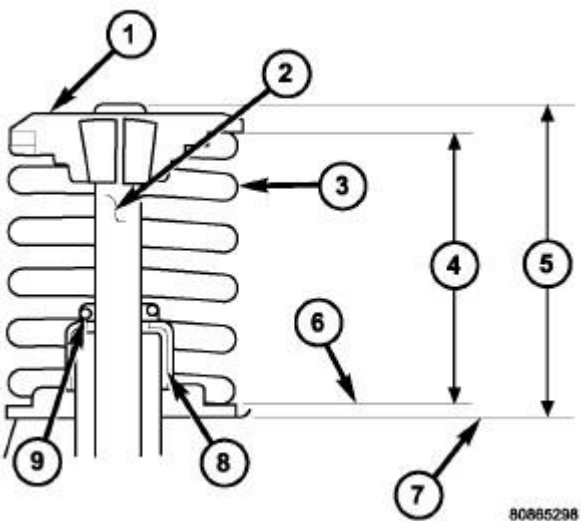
Valve Tip Height & Valve Spring Installed Height
